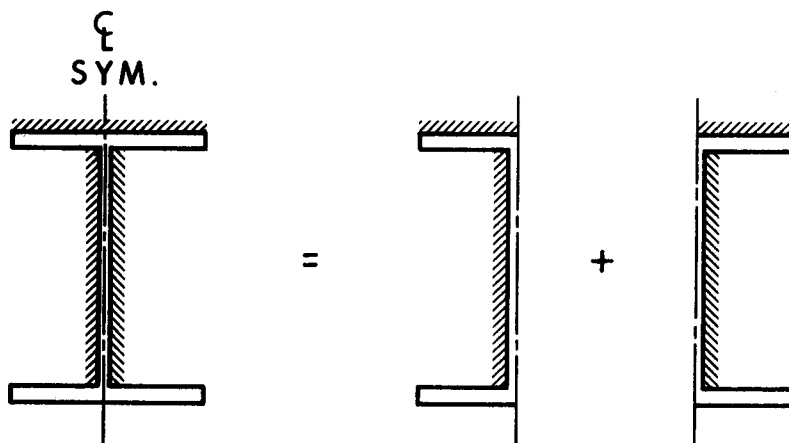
SYMMETRICAL TEE-SHAPED FILLET WELD
